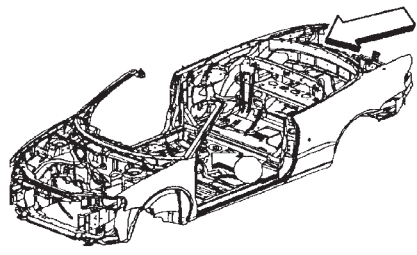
BODY SIDE APERTURE, INNER QUARTER PANEL & WINDSHIELD FRAME
